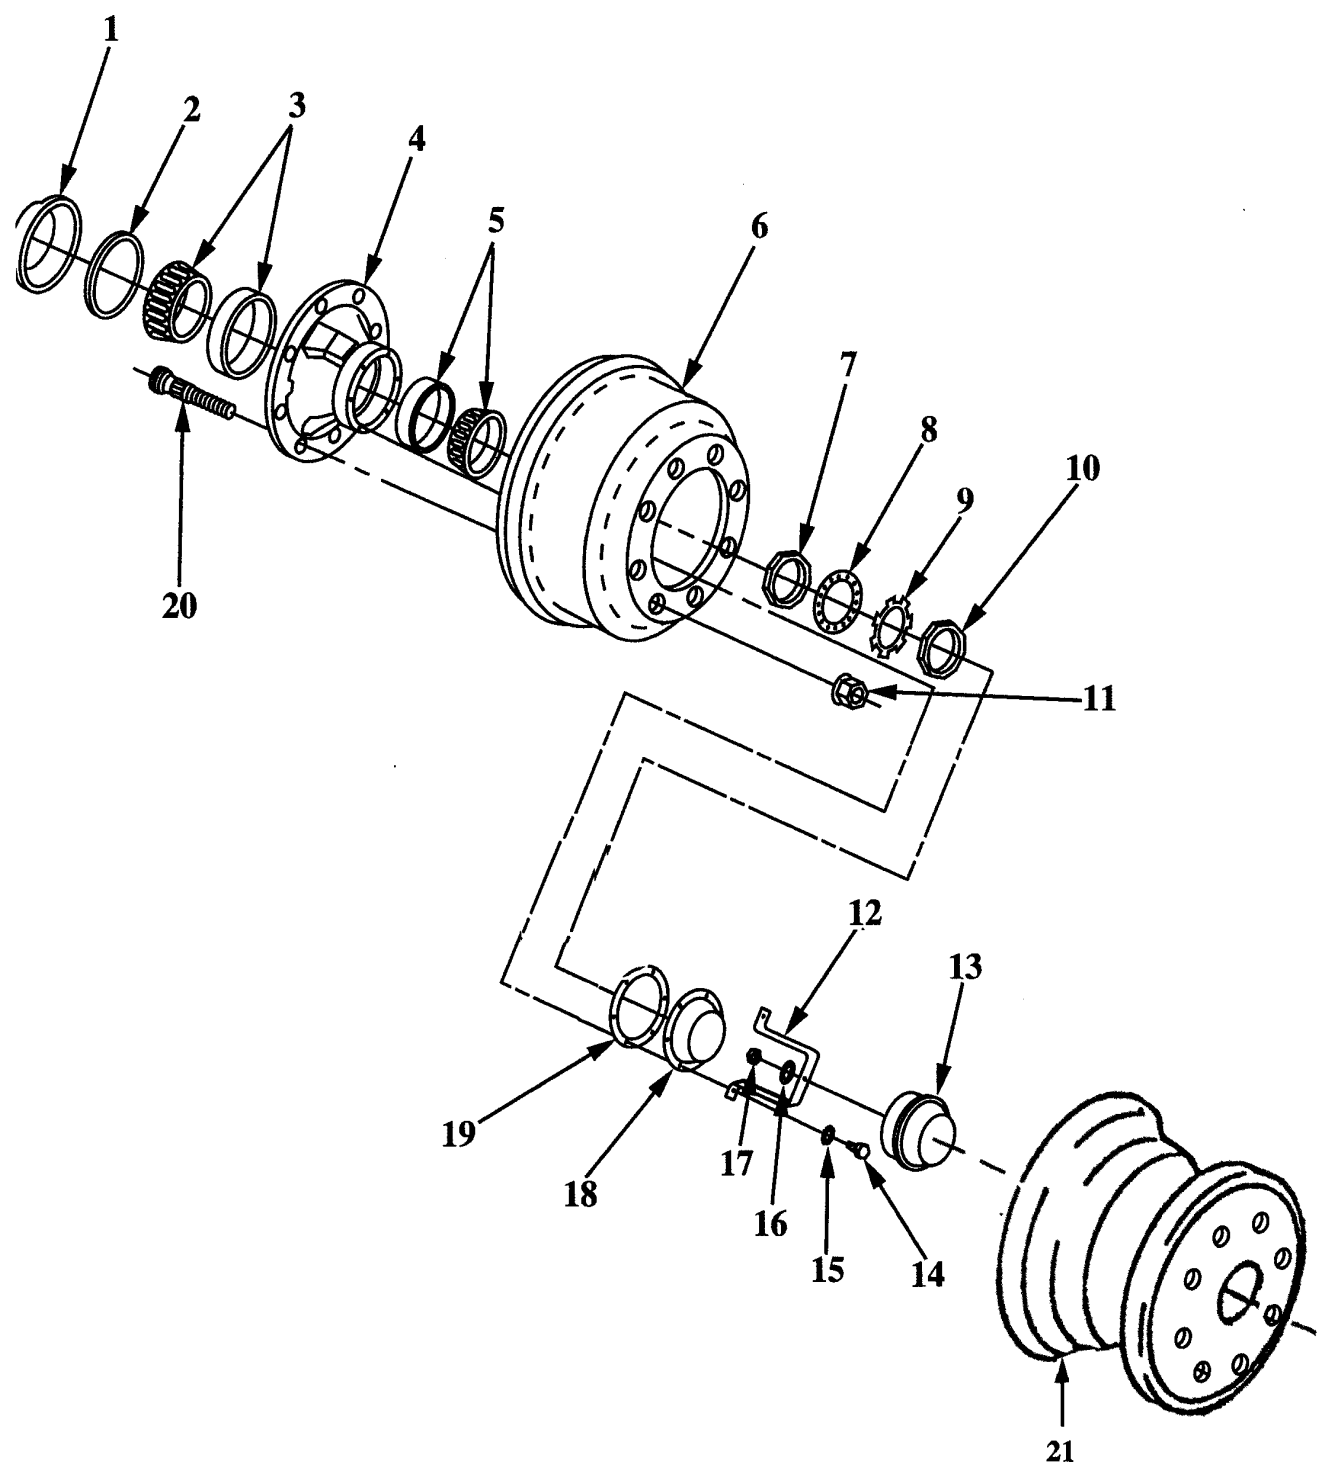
Wheel, Hub, and Drum Assembly (M129A4 Only)
